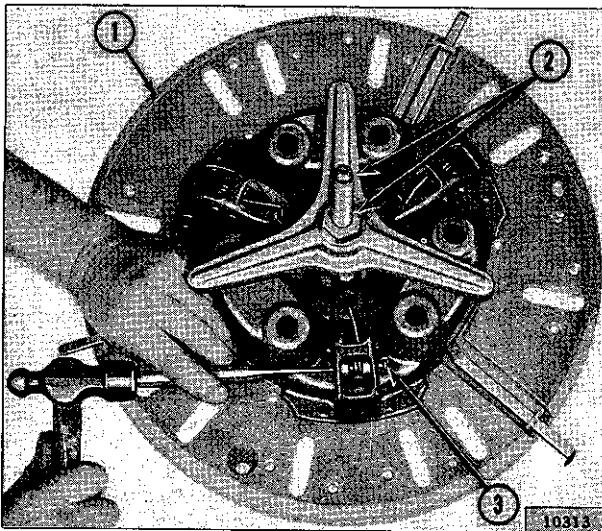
DISASSEMBLING ROCKFORD CLUTCH
